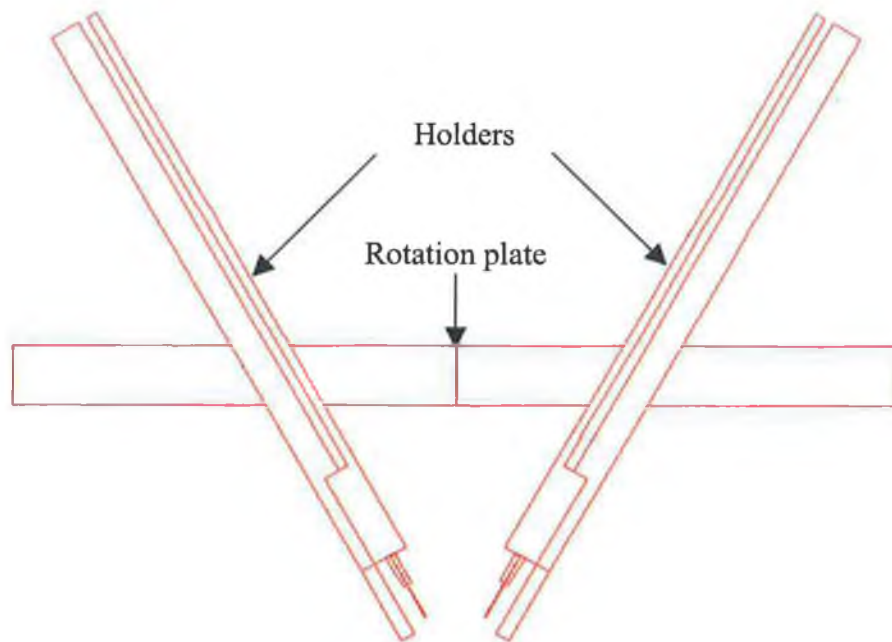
Front view of the optical fiber holder and the rotation plate.
